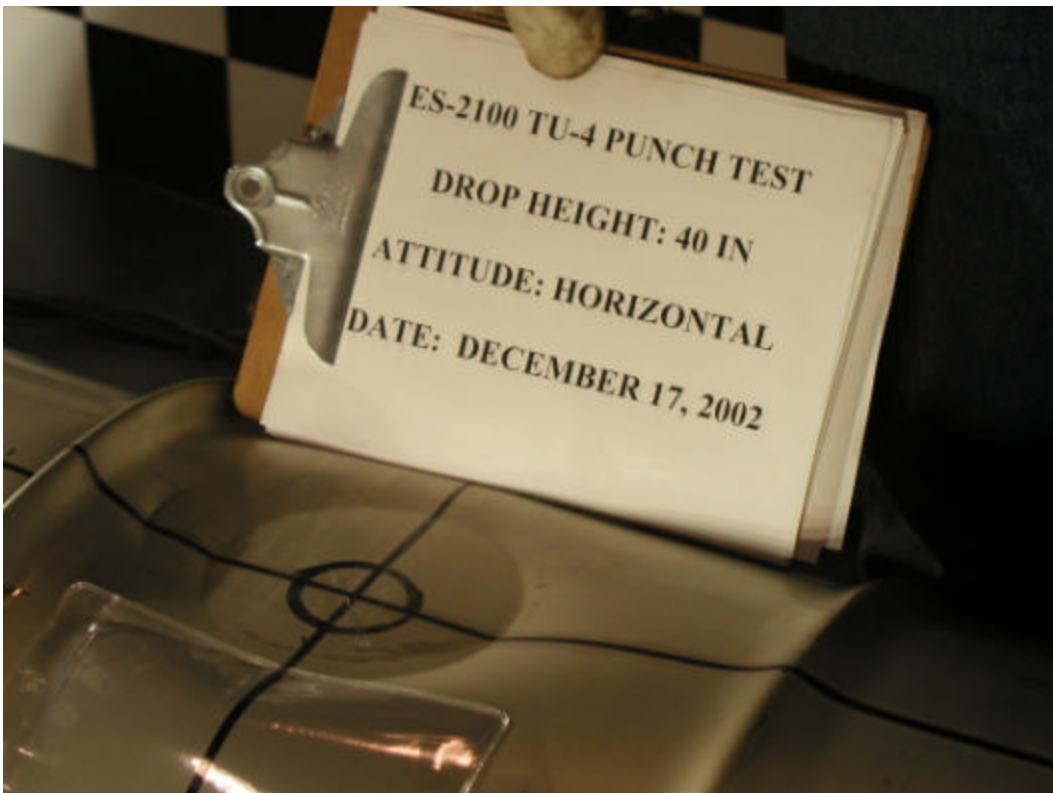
Close-up of punch damage to TU-4 caused by the punch test.
